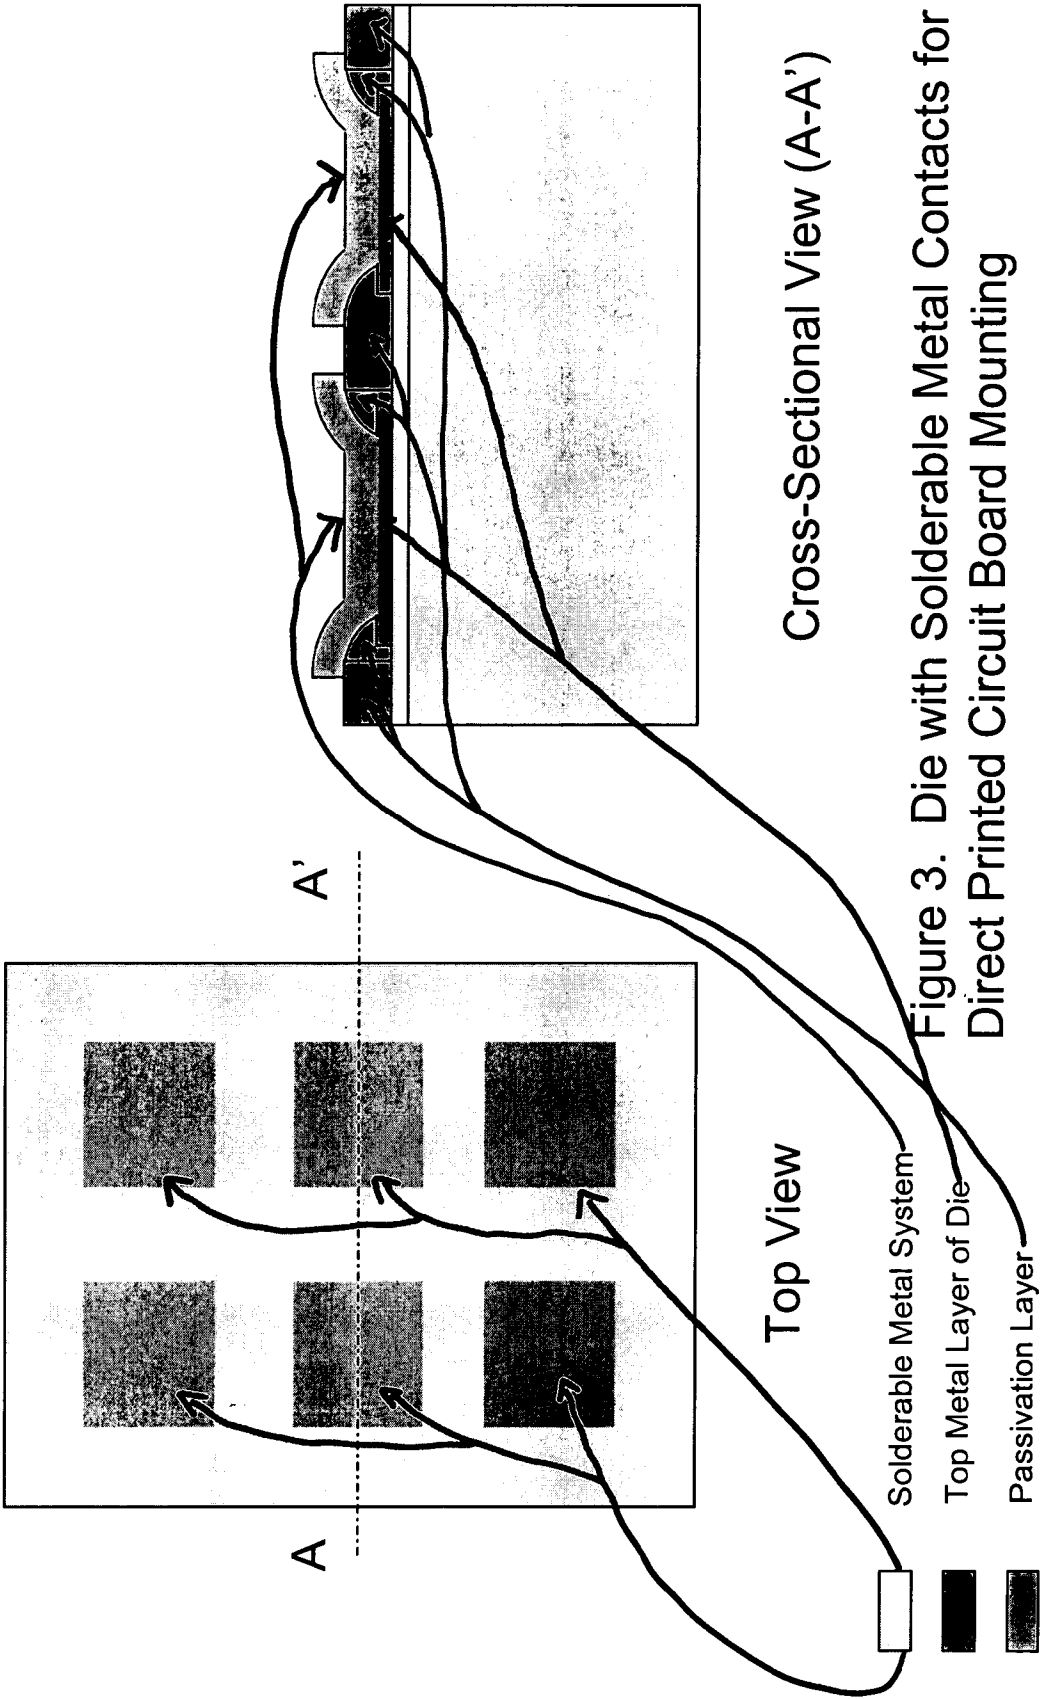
Die with Solderable Metal Contacts for Direct Printed Circuit Board Mounting
